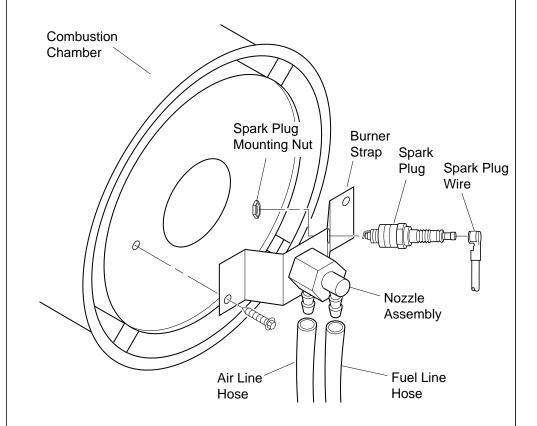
Spark Plug Removal, 30,000 BTU/Hr Model
